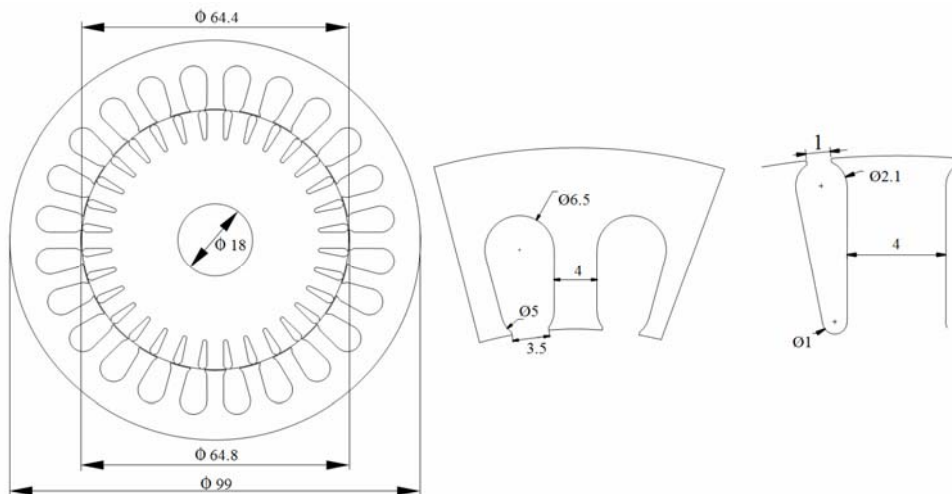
The main geometrical dimensions of the stator and the rotor respectively.
